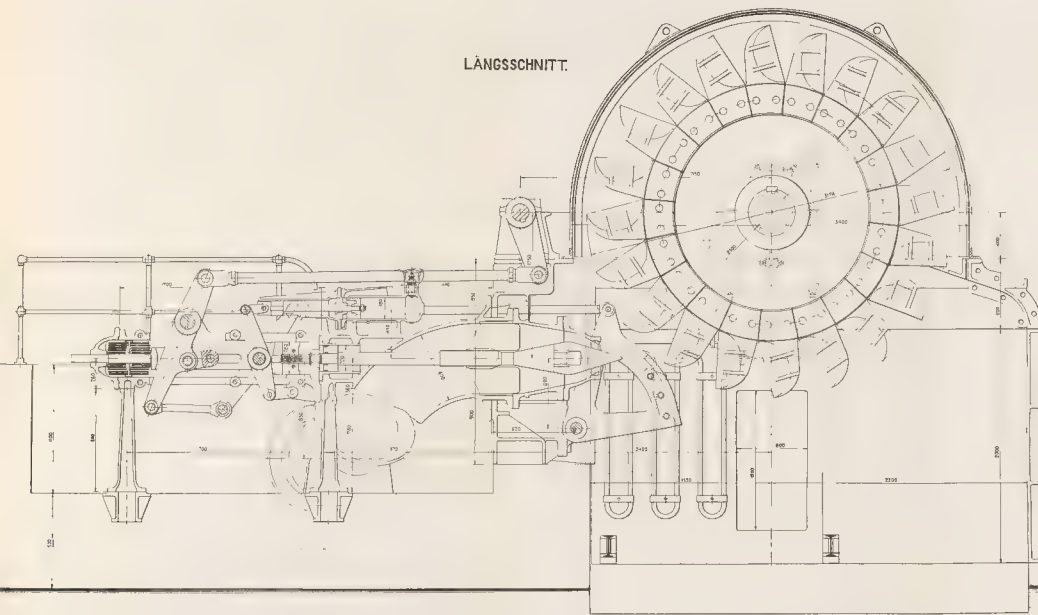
Plate VII. Single-Runner, Single Deflecting Nozzle, Horizontal-Shaft Pelton Wheel
